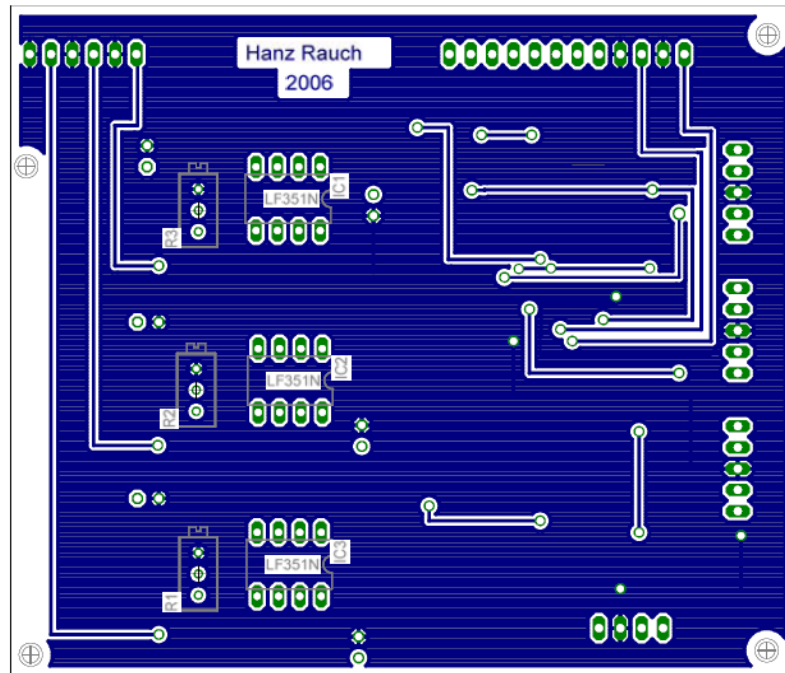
Signal Conditioning and Router PCB Board Bottom
